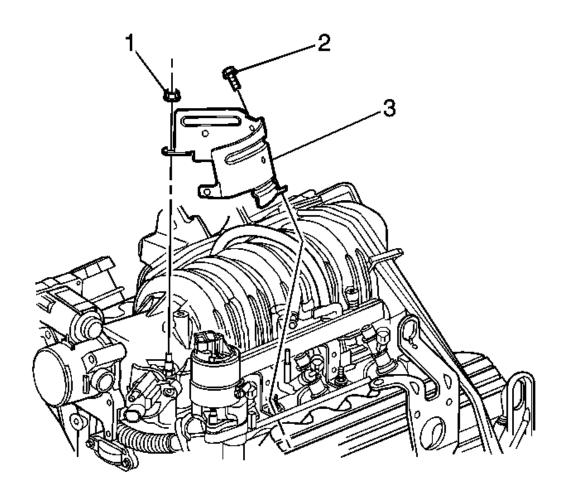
EGR Valve Wiring Harness Heat Shield Nut & Bolt Courtesy of GENERAL MOTORS CORP.
